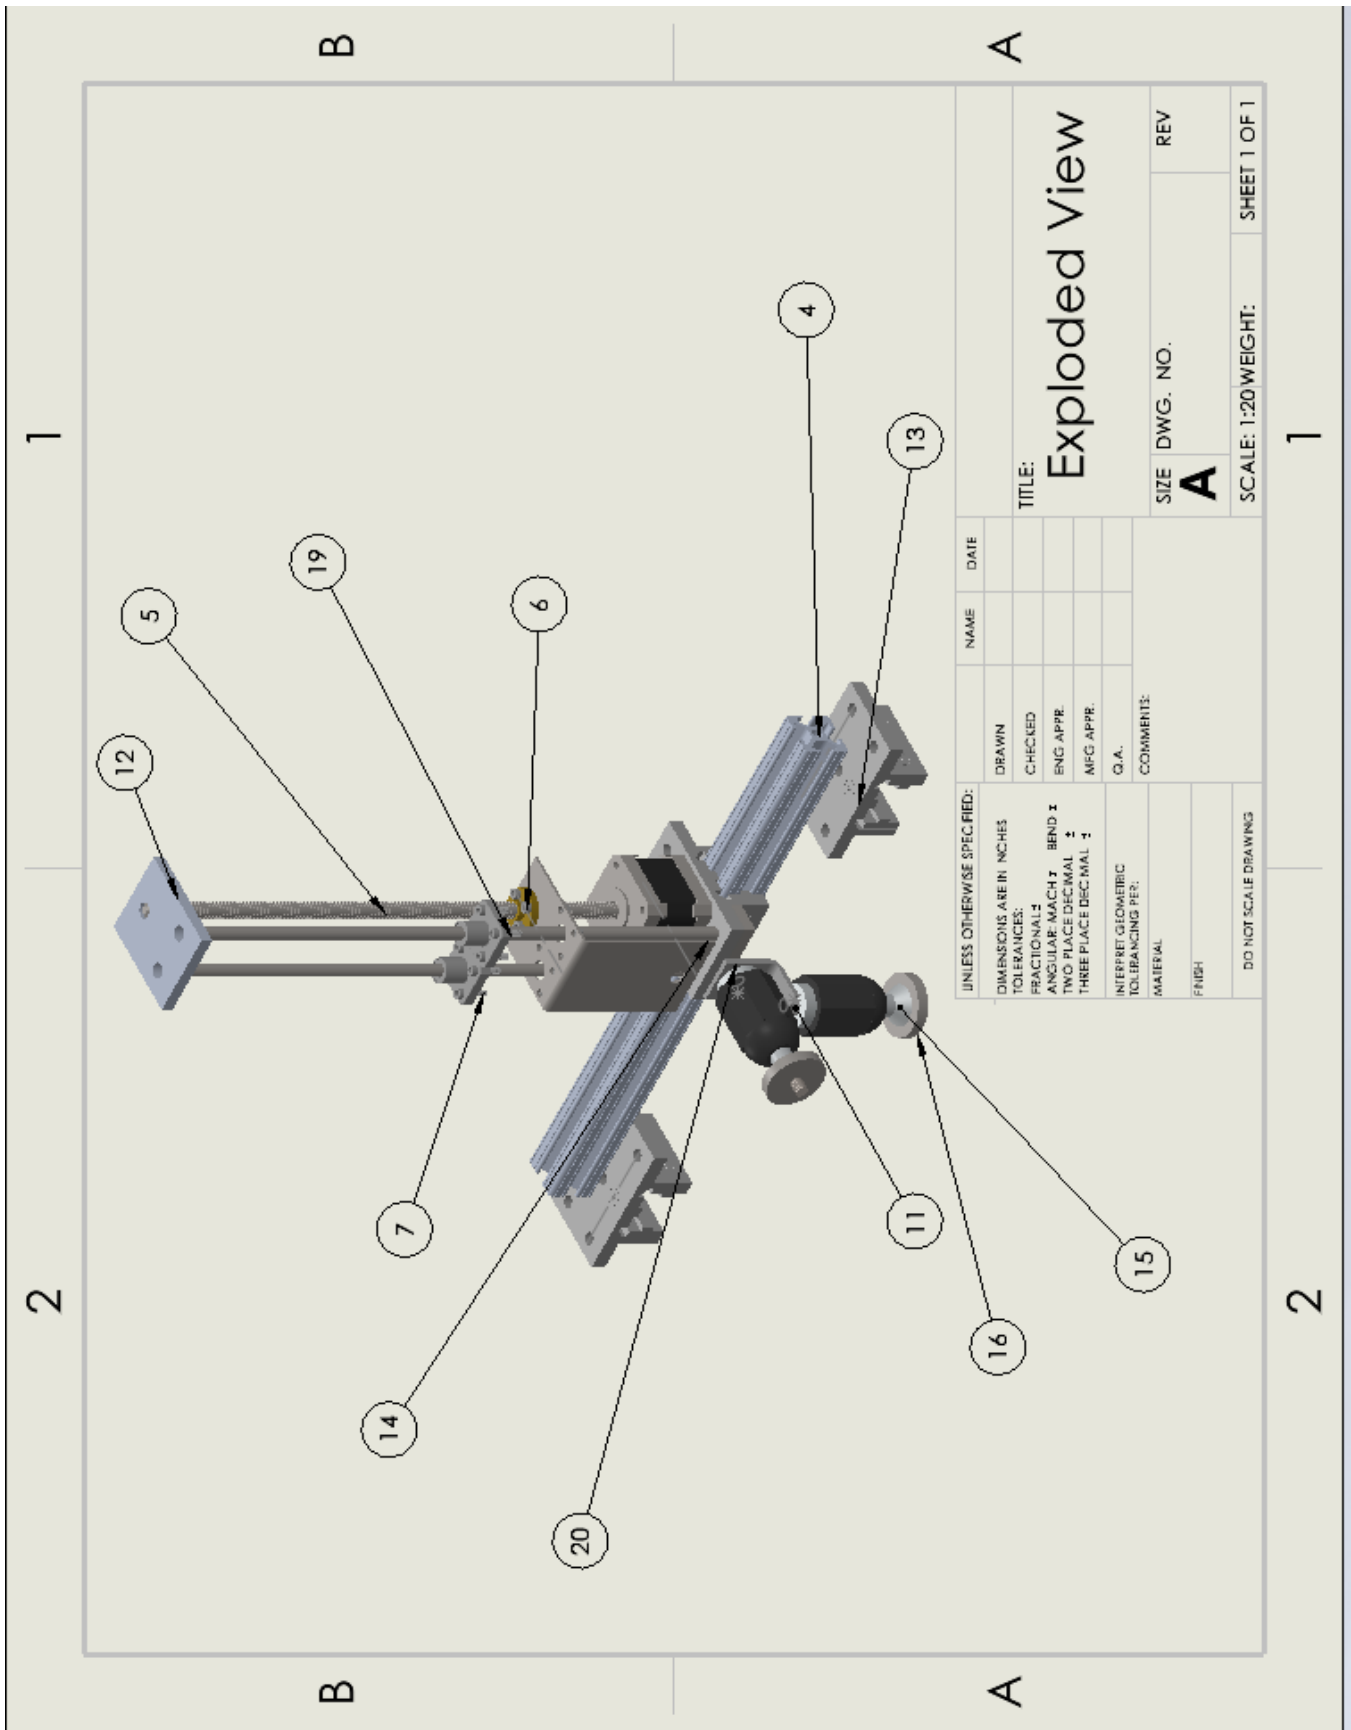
Exploded view with callout to BOM. Frame removed for simplicity.
